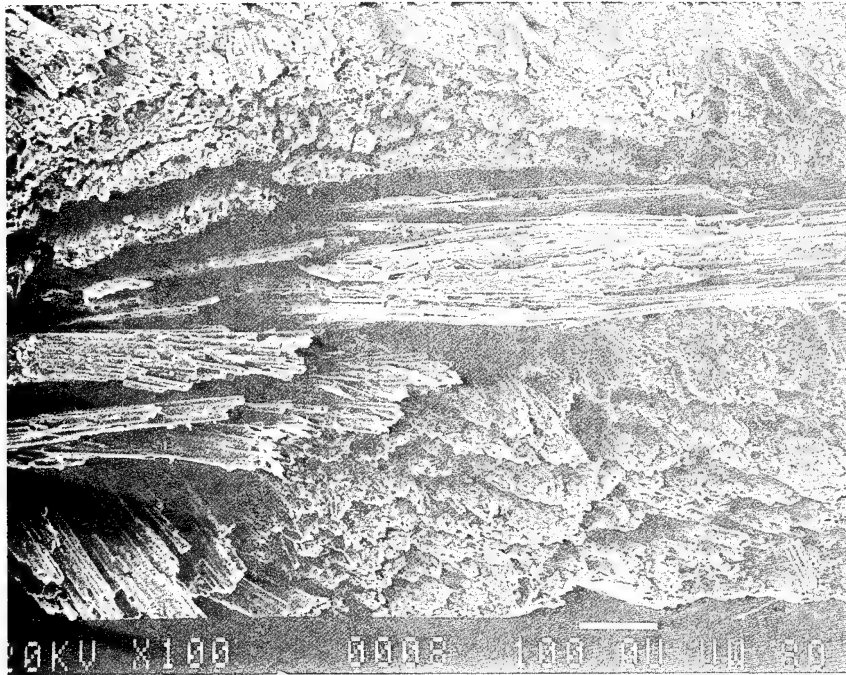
Specimen No. II-ACL-4210A-2-14, C-C, -65FW; Fracture Surface at 45° to Load Direction
